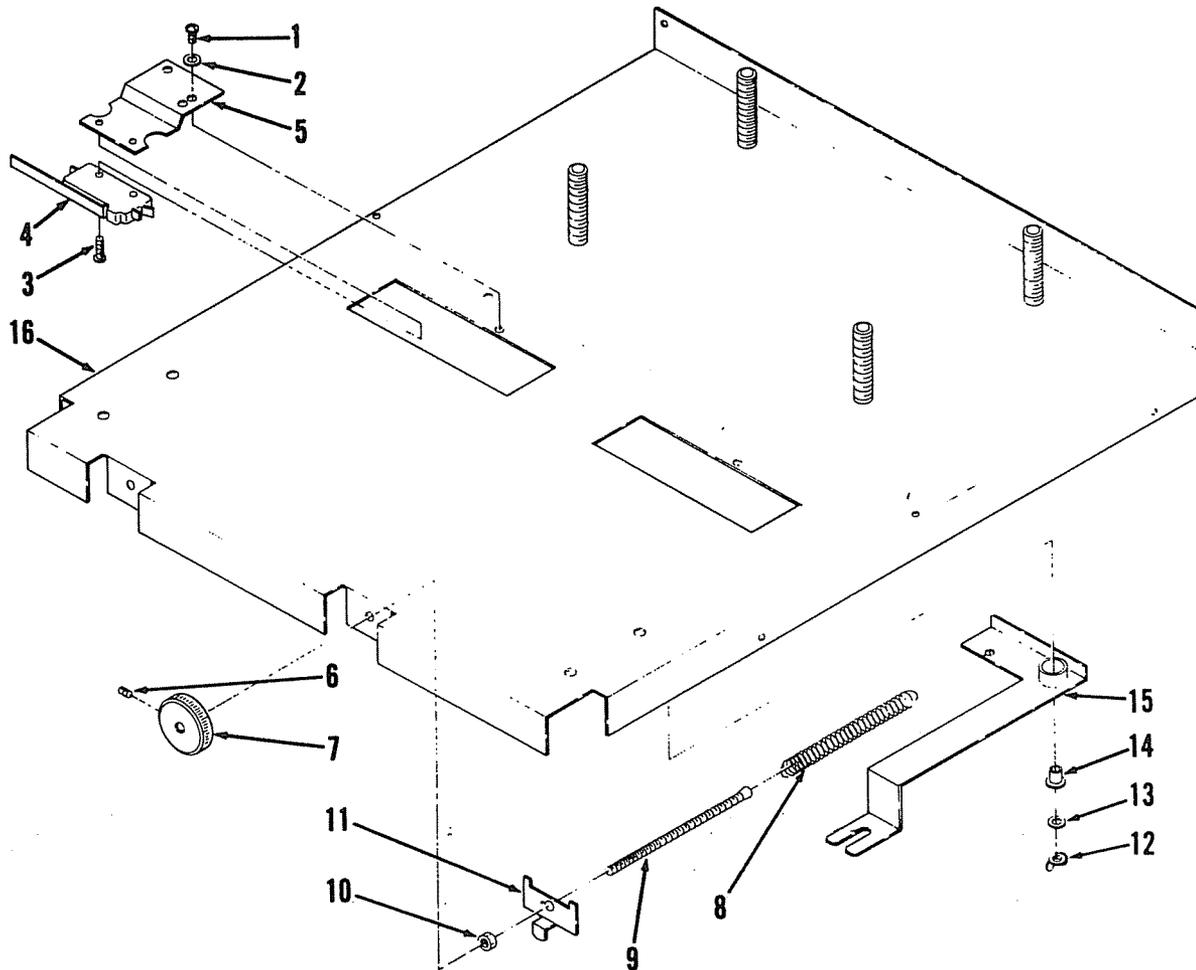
PRE-COOL REFRIGERATION ASSEMBLY
